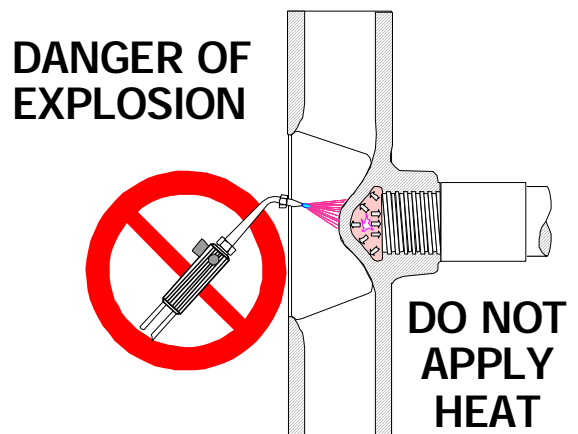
B Do not apply heat in order to remove the impeller
